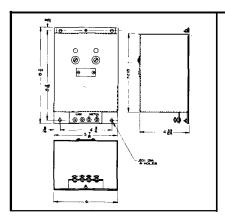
Outline Dimensions and Drilling Plan for Transducer used with Frequency Meter.
